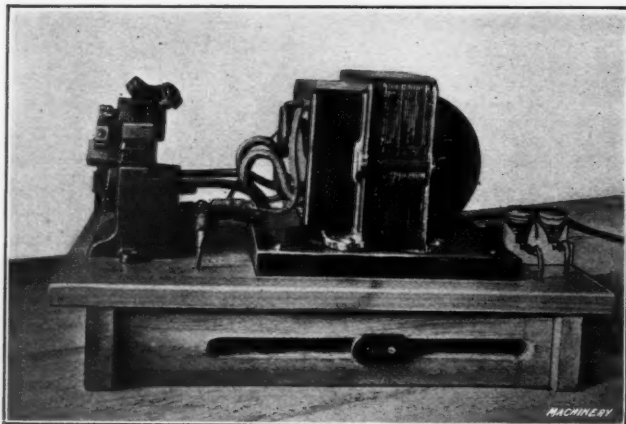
Example of Unit Equipment for soldering Optical Frames
